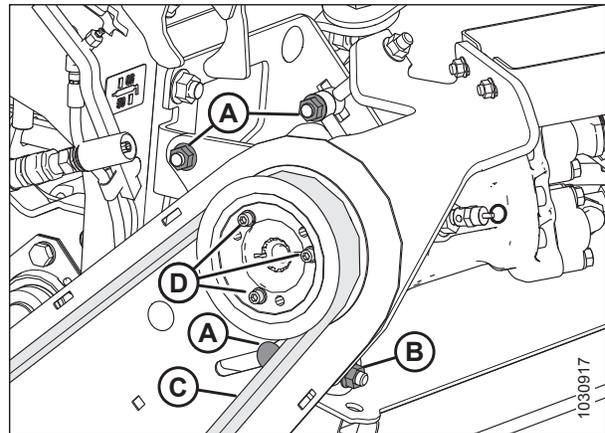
Drive Pulley – Conditioner Drive Motor
